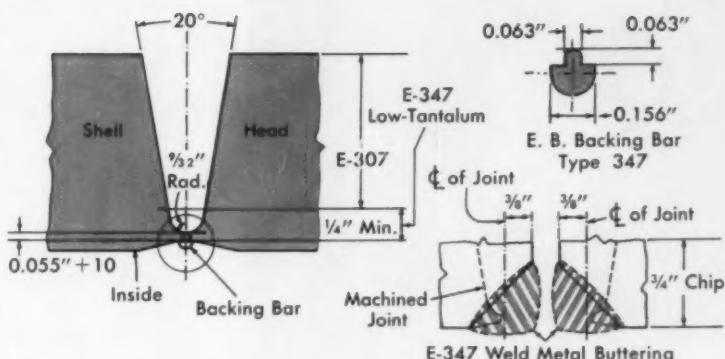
Circumferential Joint Between Each Head and the Shell. Backing bar exposes a relatively smooth surface on the side of the tank thus avoiding pickup of radioactive particles. "Buttering" with E-347 electrodes before machining the backing bar joint provides metal containing about 5% ferrite which minimizes the chance of crack formation at the joint during welding
